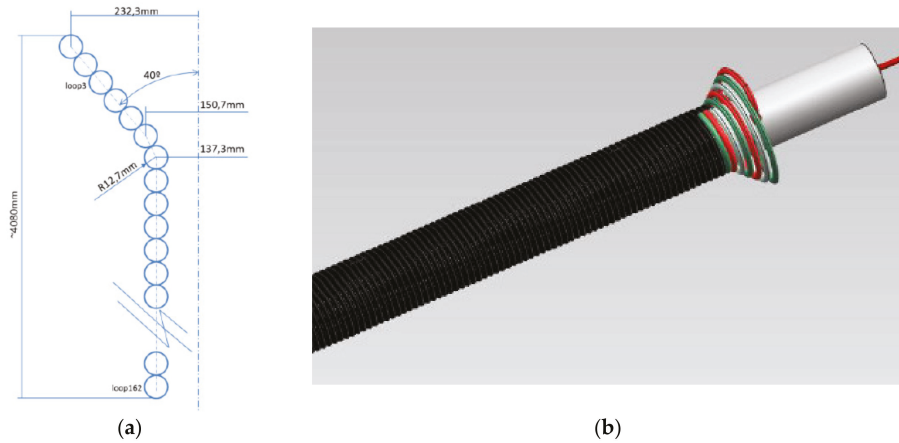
Receiver design: (a) Main dimensions; (b) 3D view.
